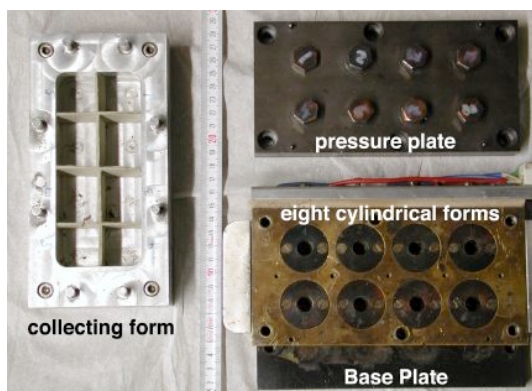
View of the eightfold mold. The samples are placed in cavities in the brass plate, which is mounted between the bottom base plate and the upper pressure plate. After cure, the base plate is removed, the brass and pressure plate are placed on top of a collection form and the samples are pushed through the cavities.
